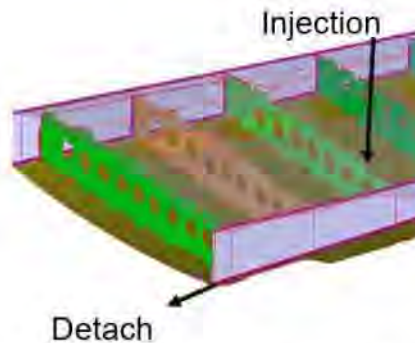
Test Configuration 3- Rib 7 fastener injection, Upper Wing skin TE ext.
